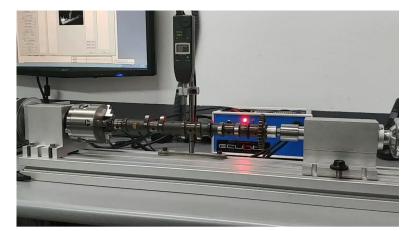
A lathe and chuck driven camshaft inspection machine
